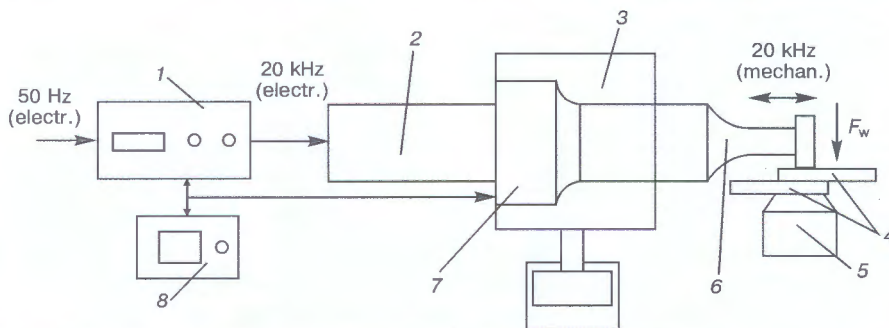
Schematic of the machine for USW: 1 — generator; 2 — converter; 3 — welding press; 4 — parts to be joined; 5 — support; 6 — waveguide; 7 — amplifier; 8 — control device
